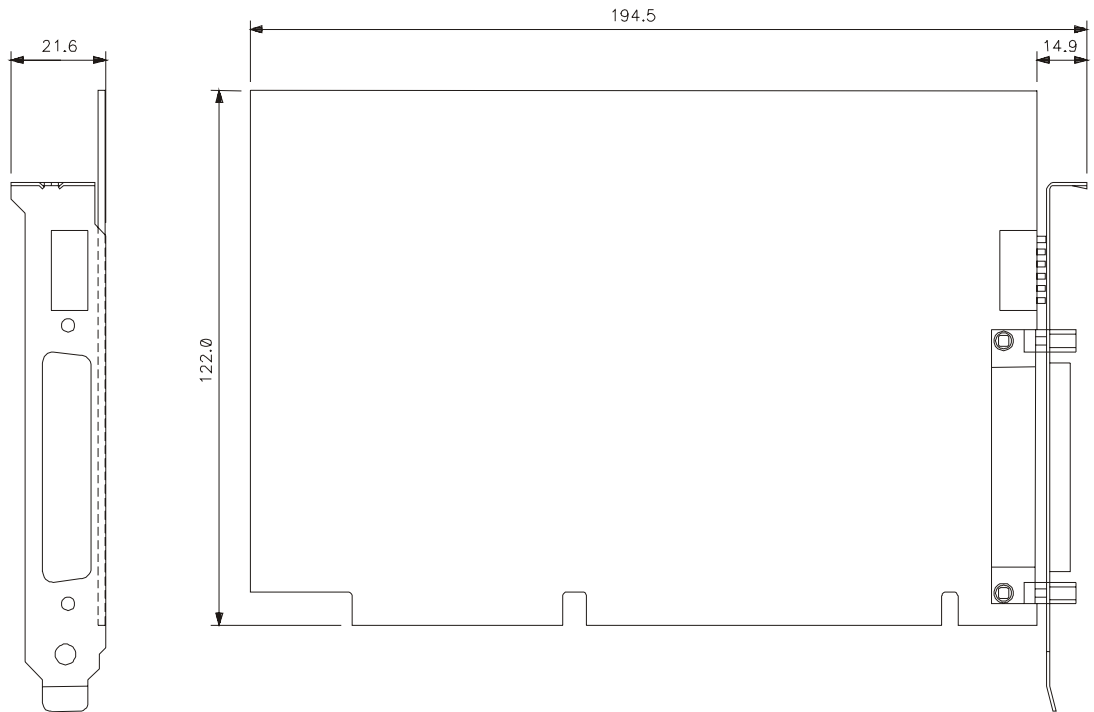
PCI302 card V1.1x Physical dimensions (mm).
